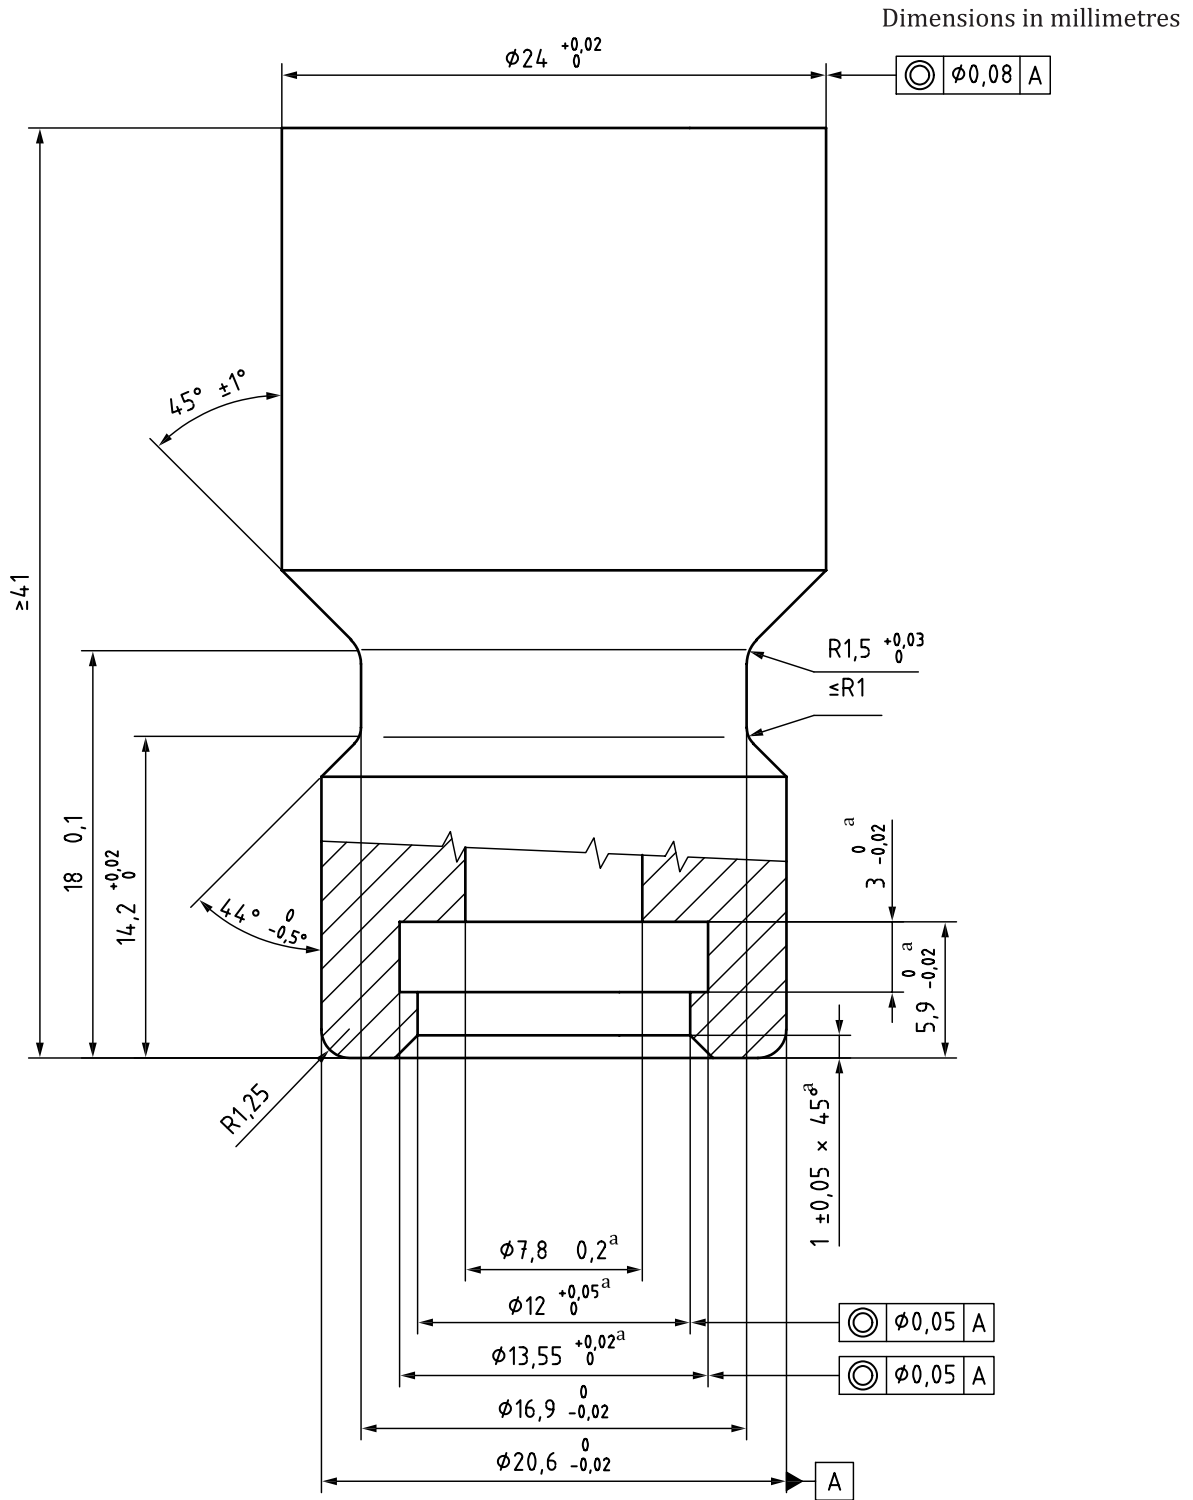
B250 - “Tight fit” tolerances
